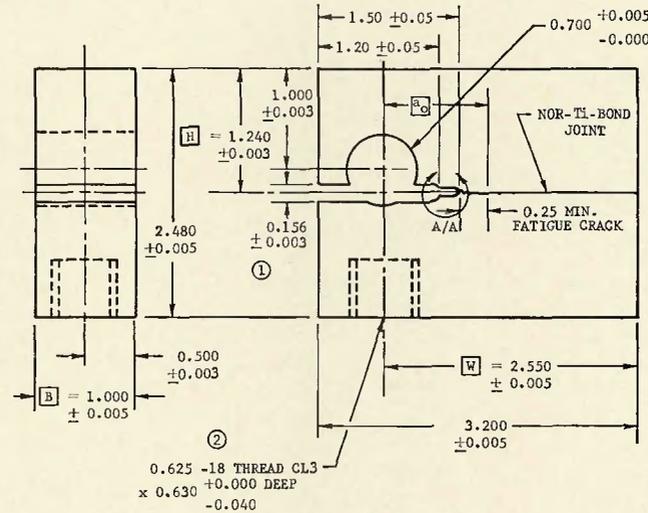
1T-type wedge-opening-loading (WOL) specimen for joints. Notes: (1) bore and slot perpendicular to threads and face within 0.003; (2) center line of thread must coincide with center line of bore within 0.003; (3) both  $3.200 \times 2.480$  surfaces to be 32 $\frac{1}{2}$  or better with machine markings perpendicular to fatigue-crack axis; (4) do not grind any surface
